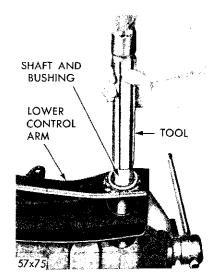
Installing Lower Control Arm Shaft and Bushing
